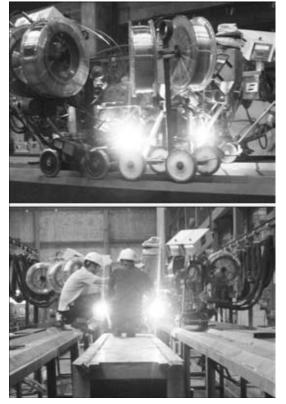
Mobile welding station with 2.4 mm flux-cored wires for twin-arc tandem SAW $\,$
